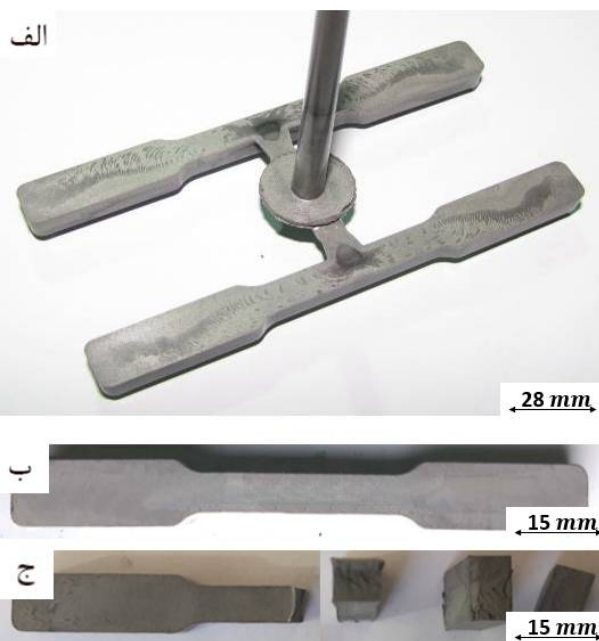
Final specimen in this study, a) after injection, b) after sintering and c) cross section of specimen after sintering.
